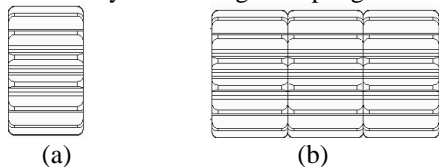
Increasing face width through multiple layer arrangement. (a) Single-layer gear. (b) Triple-layer gear
